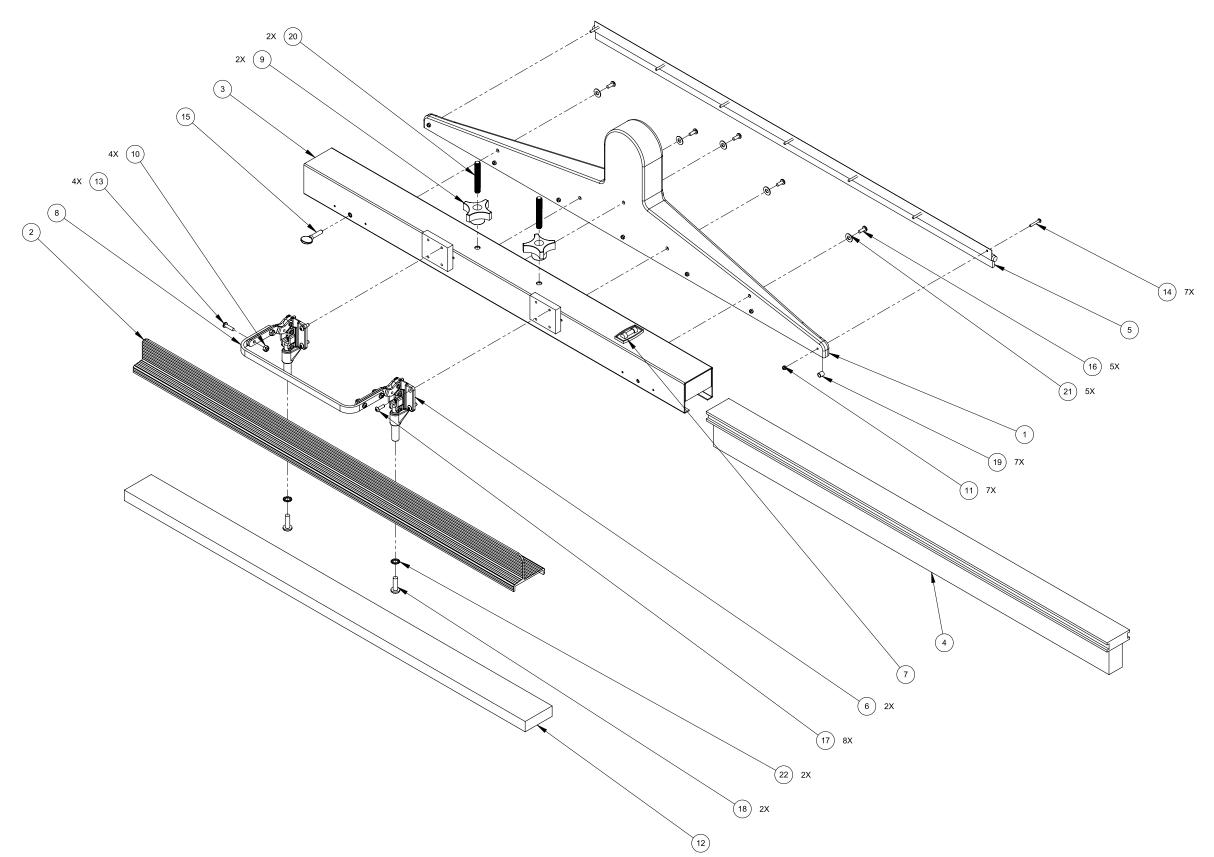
40" Nylon Grit Head Assembly 190-100-013 Rev. A
